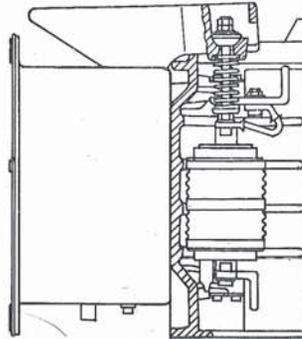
Cross Section of Vacuum Contactor. Side View
